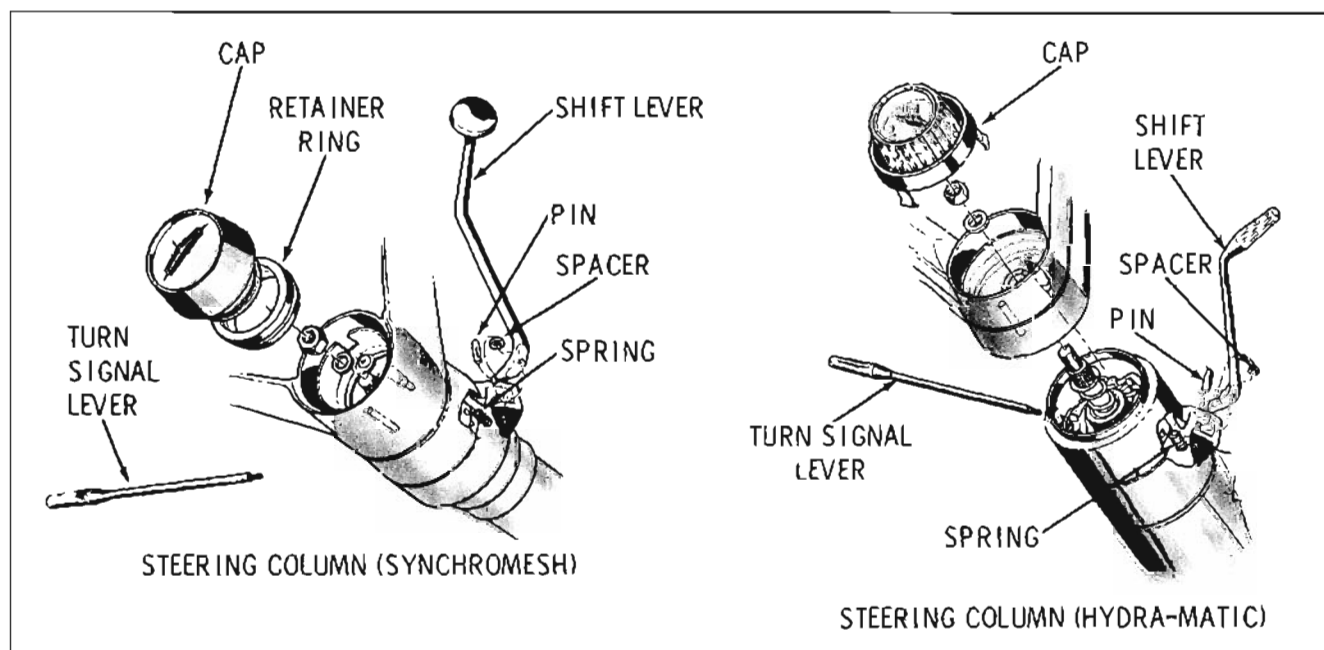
Steering Wheel Attachment (33 - 34 - 35 - 36 - 38 & 39 Series)
